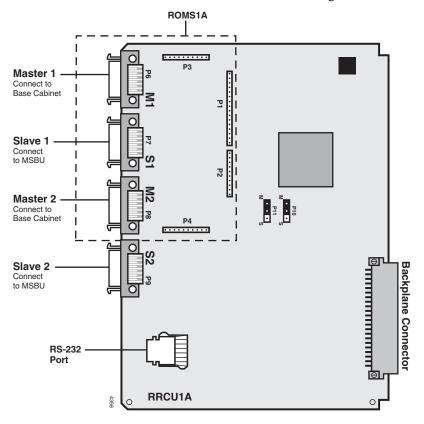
Remote Expansion Cabinet Printed Circuit Board (RRCU1A)
